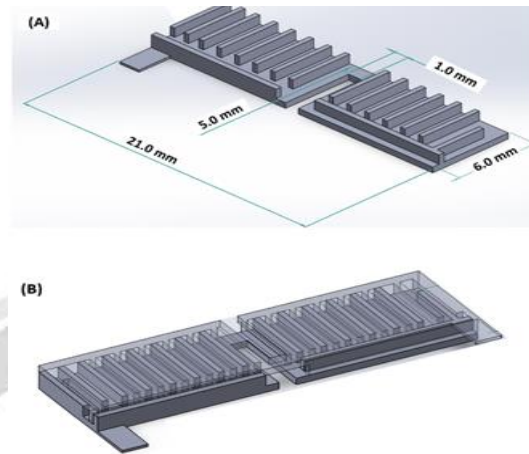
3D-printed sample holder design: (a) dimensions, (b) final assembly [73]
